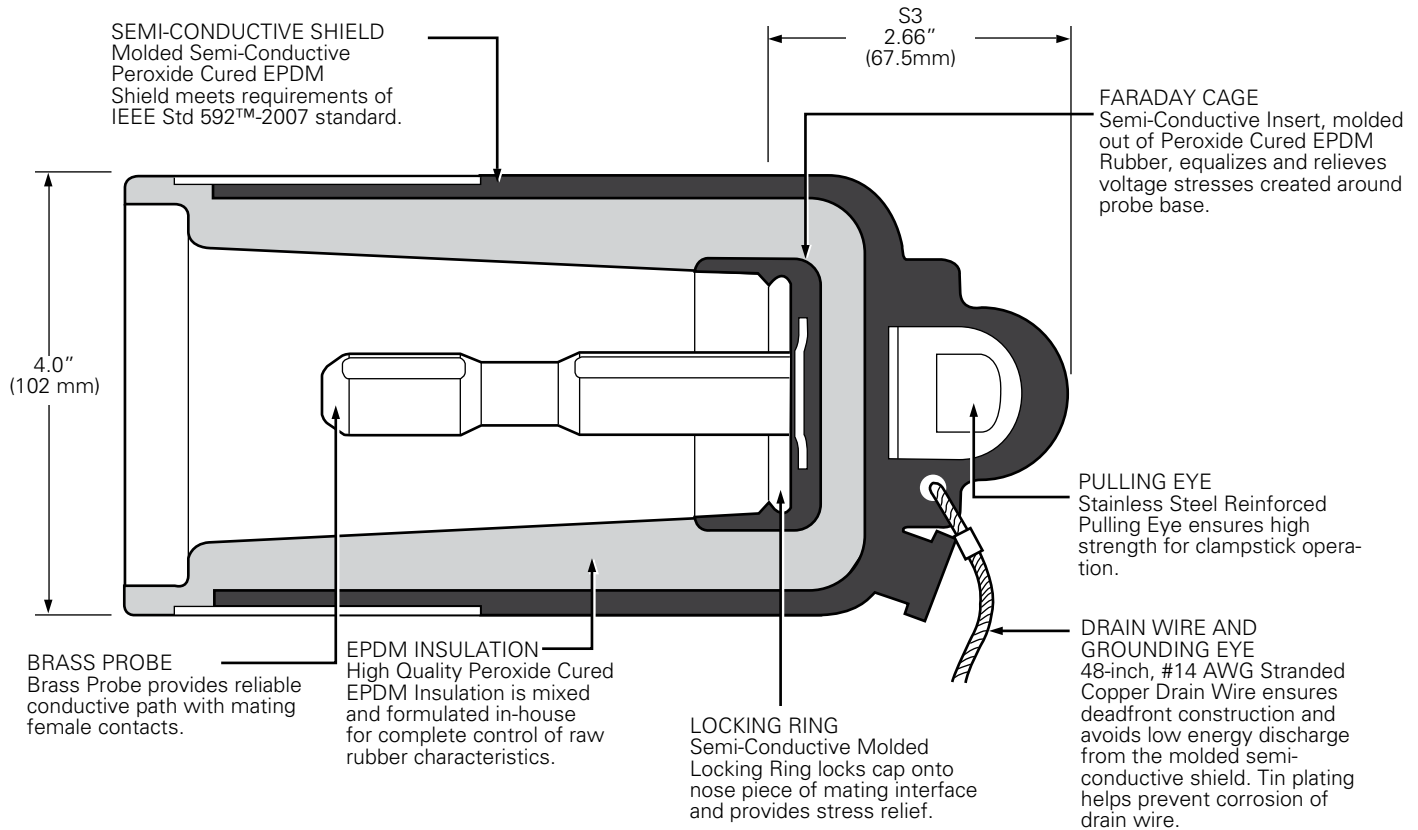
Cutaway drawing shows design integrity and stacking dimensions.
